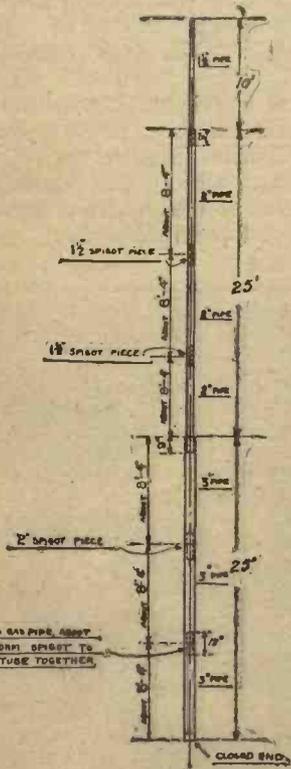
Illustrating how spigots are used for joining the larger tubes.
